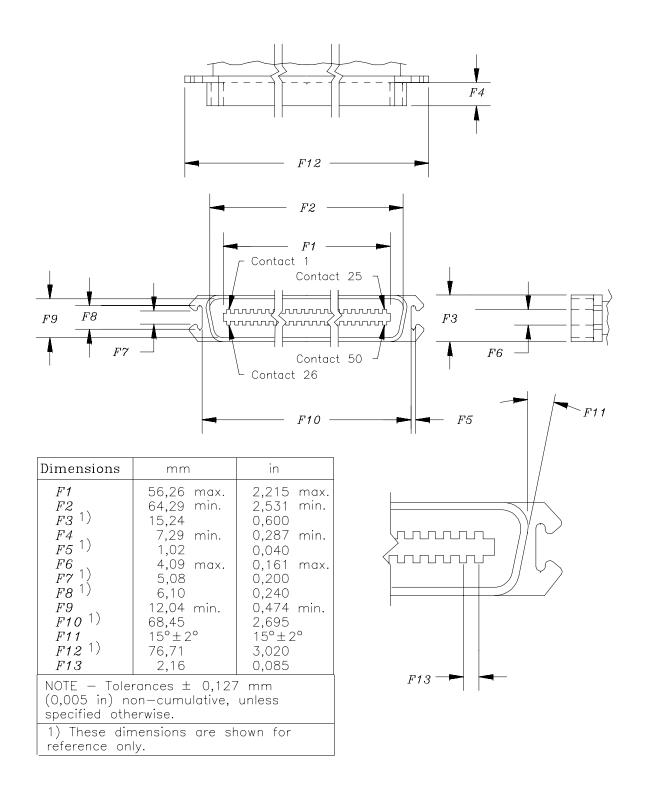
50-contact alternative 2 shielded mating connector (A cable)
